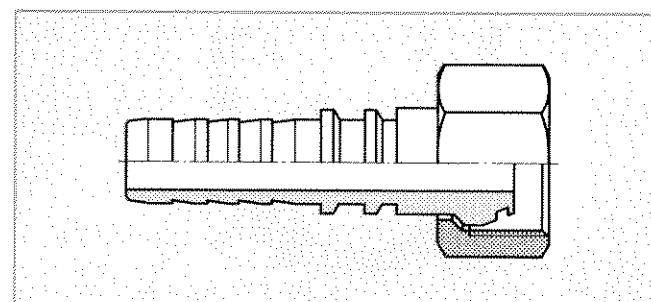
Straight hose end fitting for 24° connections with O-ring seal
